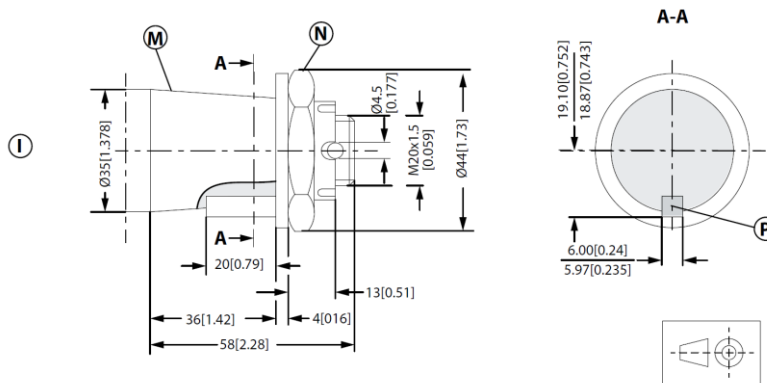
OMR shaft version: Tapered shaft 35 mm (taper 1:10)
